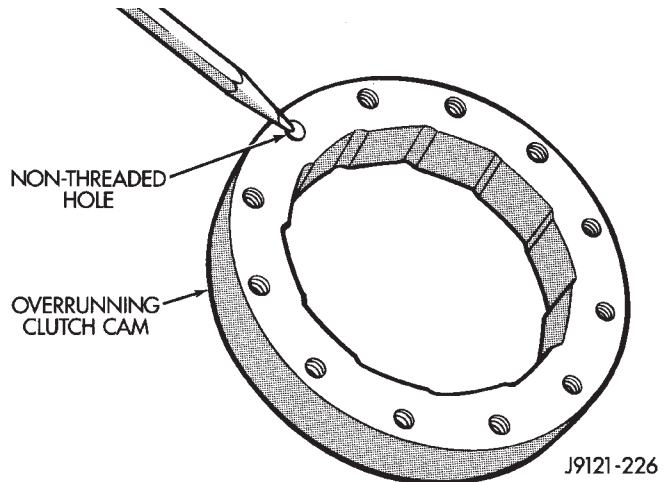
Location Of Non-Threaded Hole In Clutch Cam
